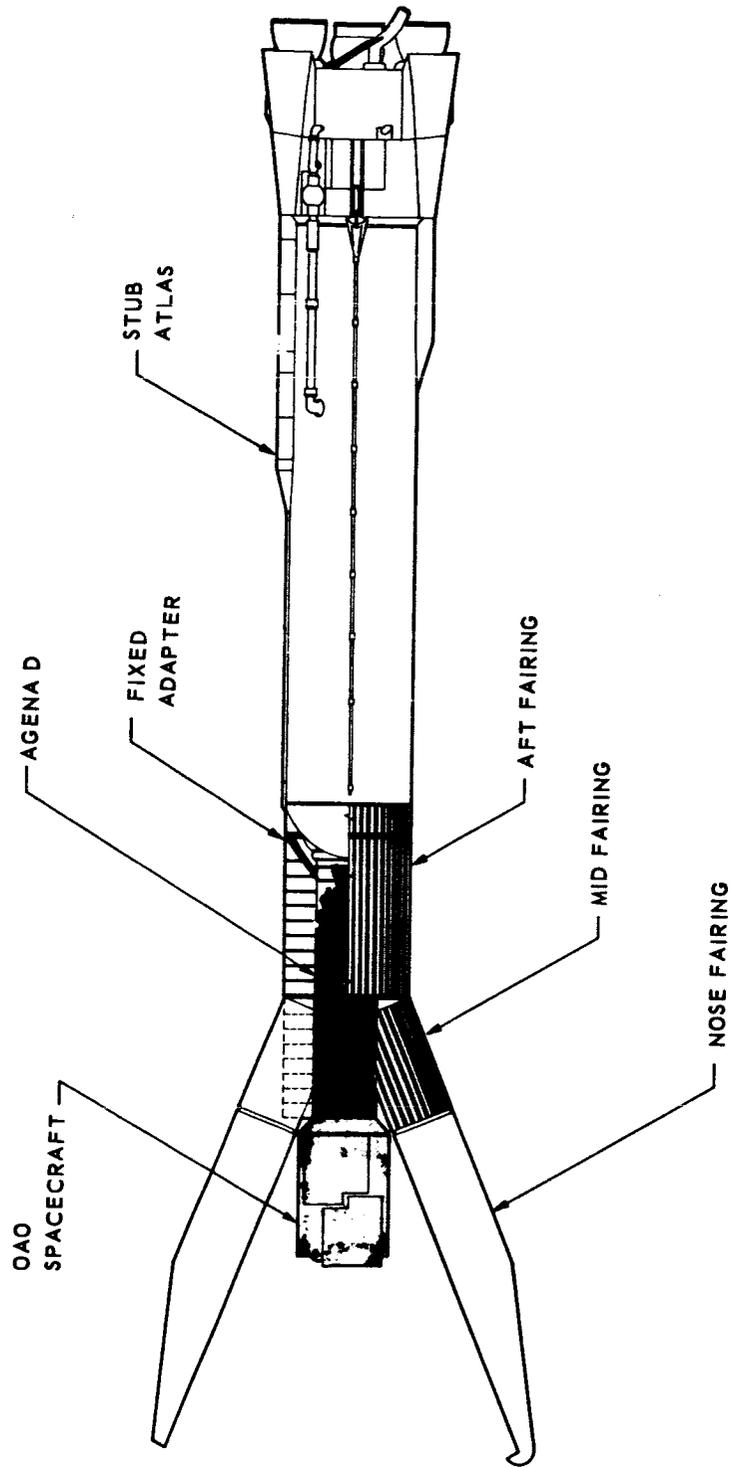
OAO Shroud Separation (Clamshell Section)
